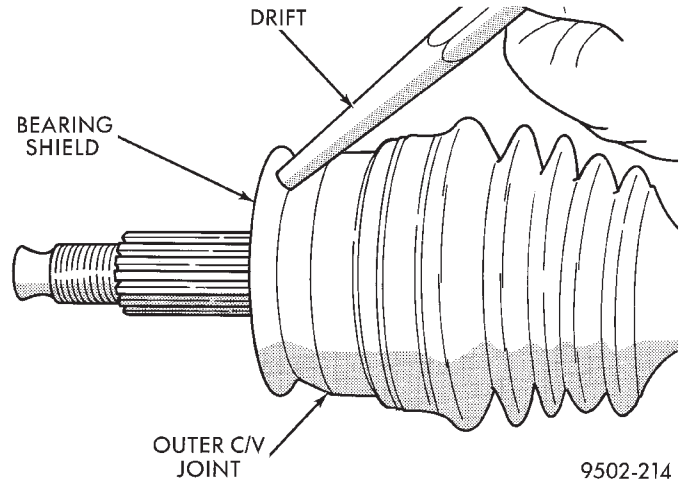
Removing Bearing Shield from Outer C/V Joint
